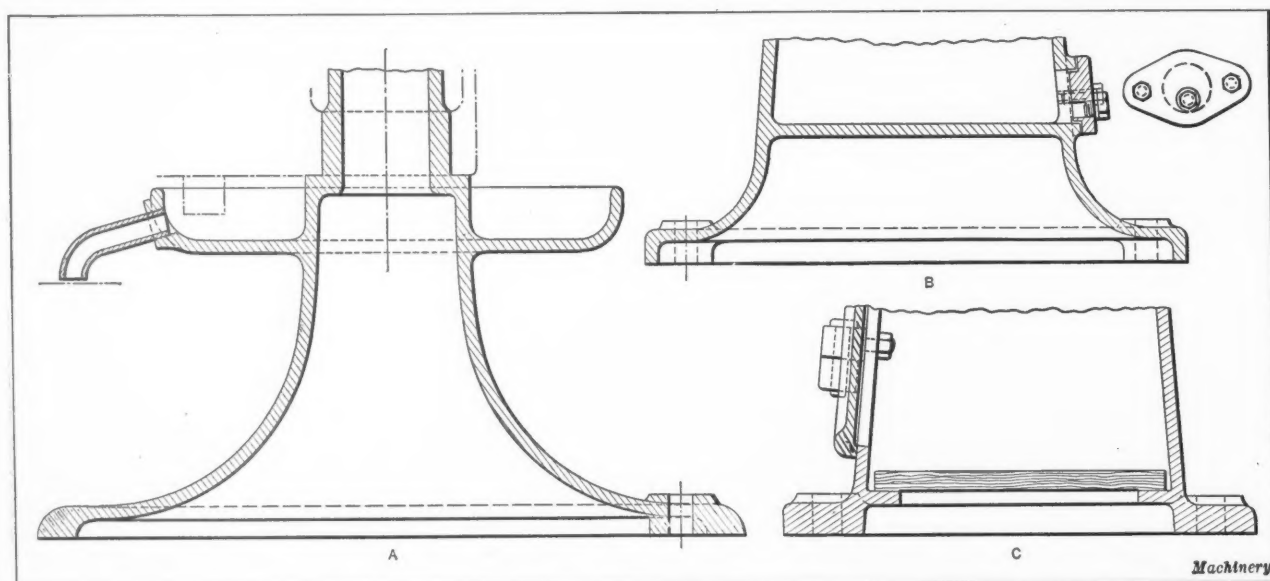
(A) Machine Base with Solid-cast Tray; (B) Grinder Base with Cast-in Water Tank; (C) Machine Base provided with Cupboard
